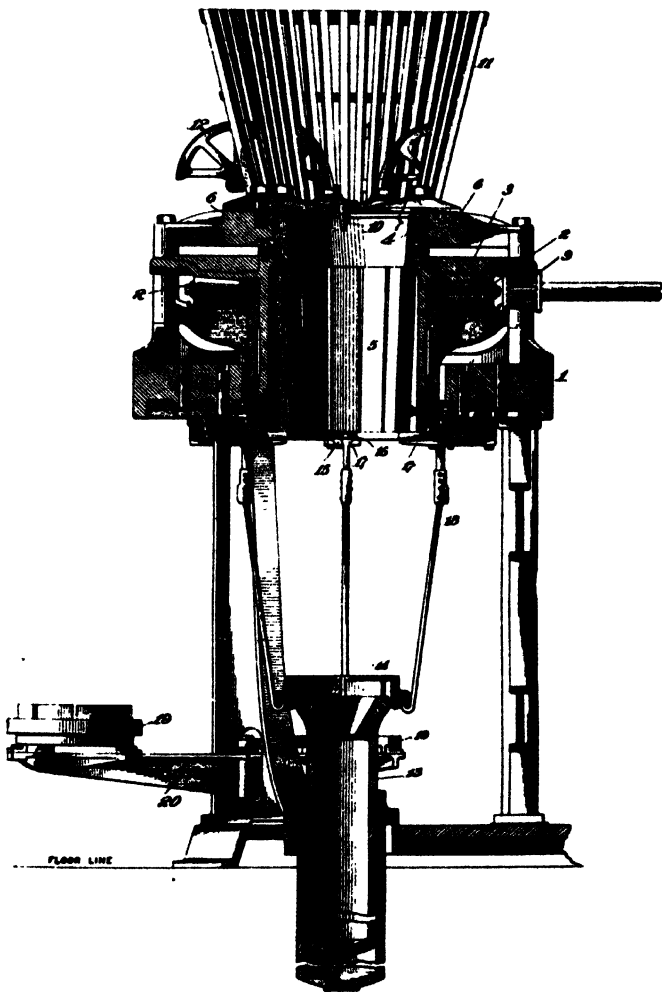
Ginnery Compress, End Packed Cylindrical Bale.
